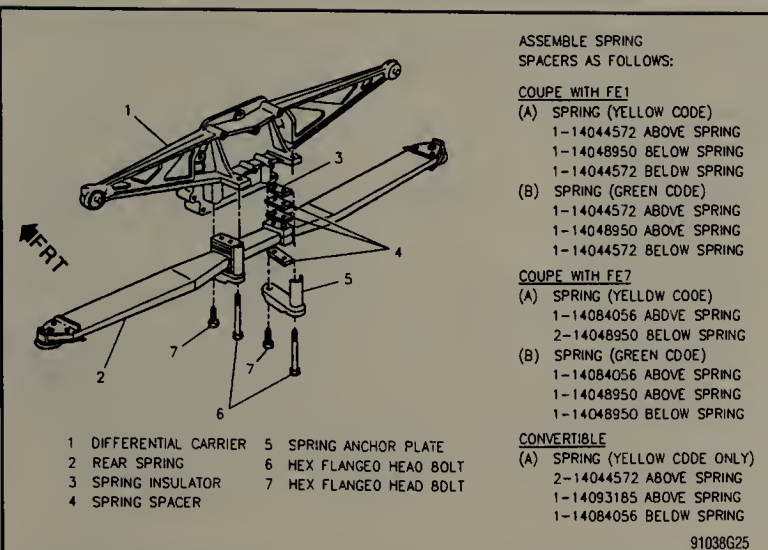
Exploded view of the transverse spring, differential carrier and related components—1996 vehicle shown, others similar
